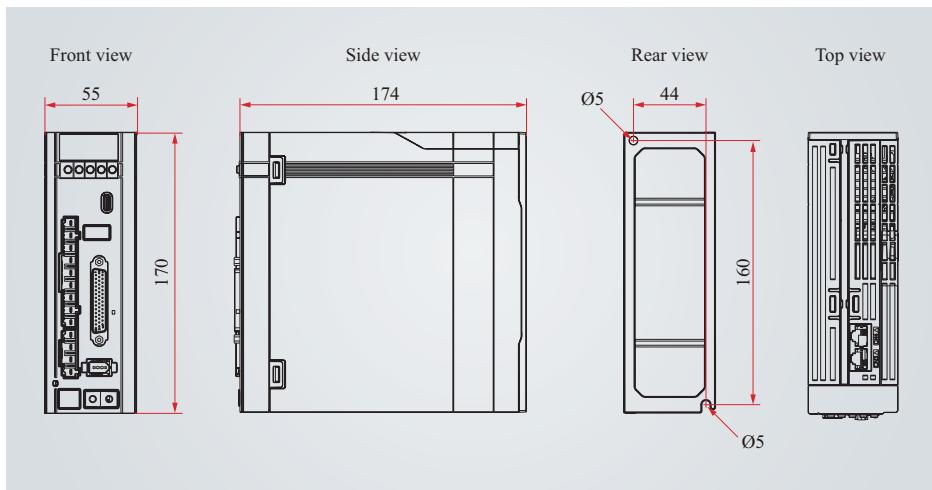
Installation dimensions for SIZE B (unit: mm)
